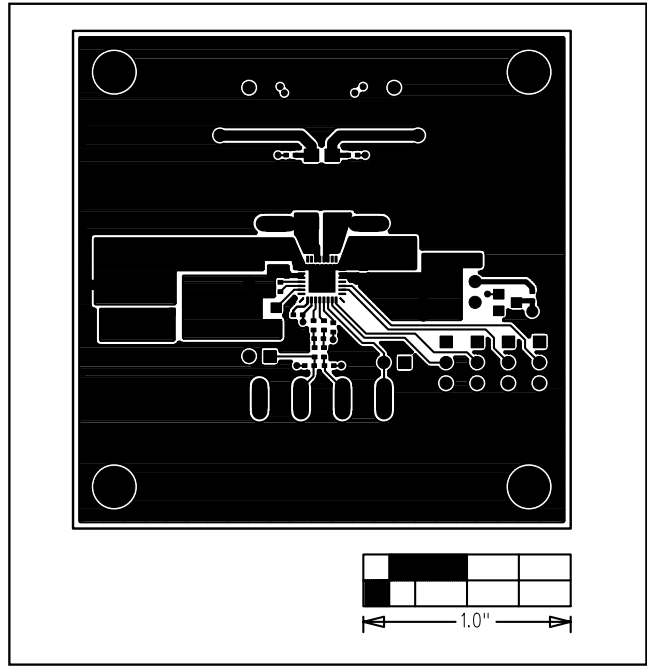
MAX9713 EV Kit PC Board Layout—Component Side
